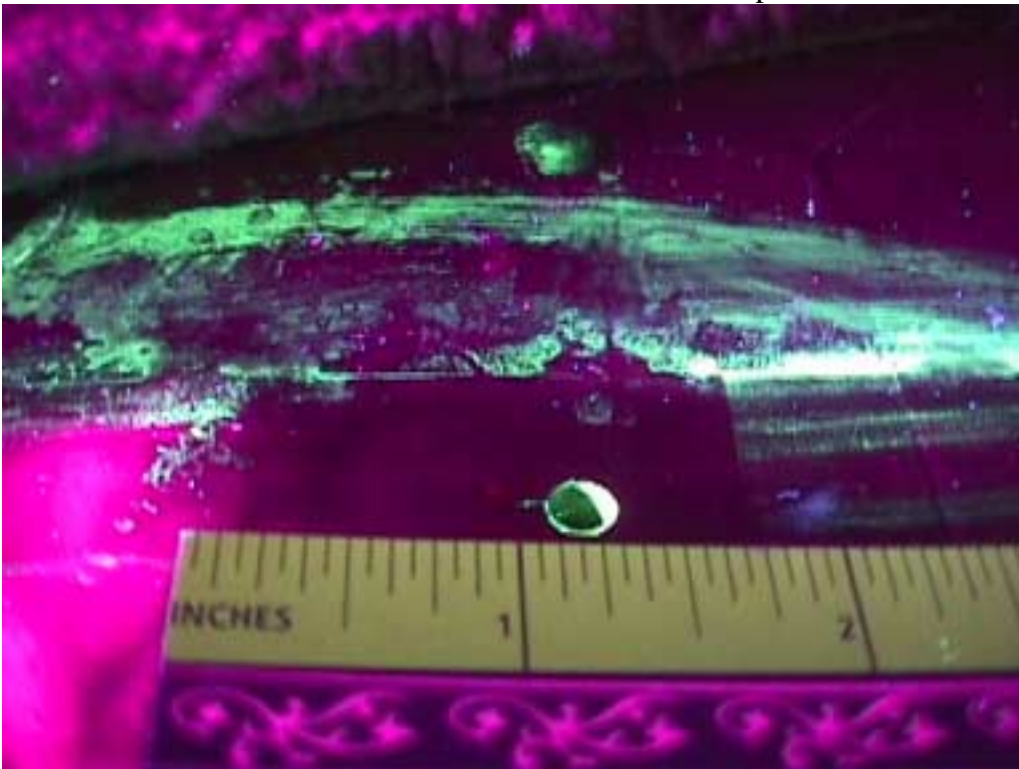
Crack-P5 under inboard forward external doubler panel. Crack is .050" in length
